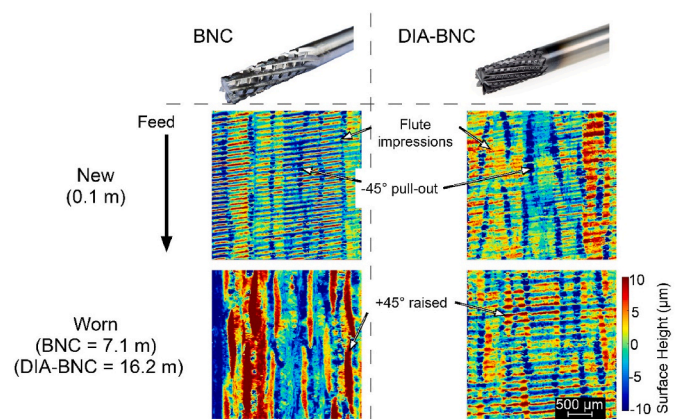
Surface height topography at start and end of coated and uncoated BNC and MFC tool life, noting surface defects caused by differing fibre orientations to the cutting edge.
